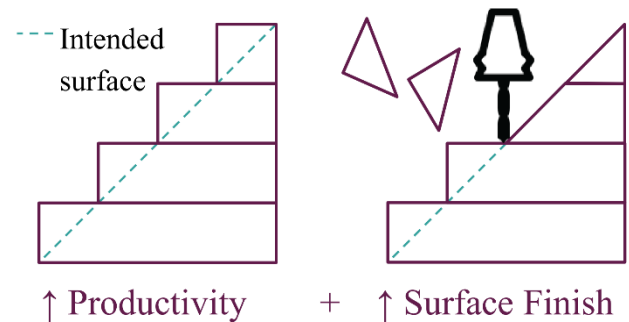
Cross-sectional view showing how an overbuilt part can be finished using CNC machining [15]
